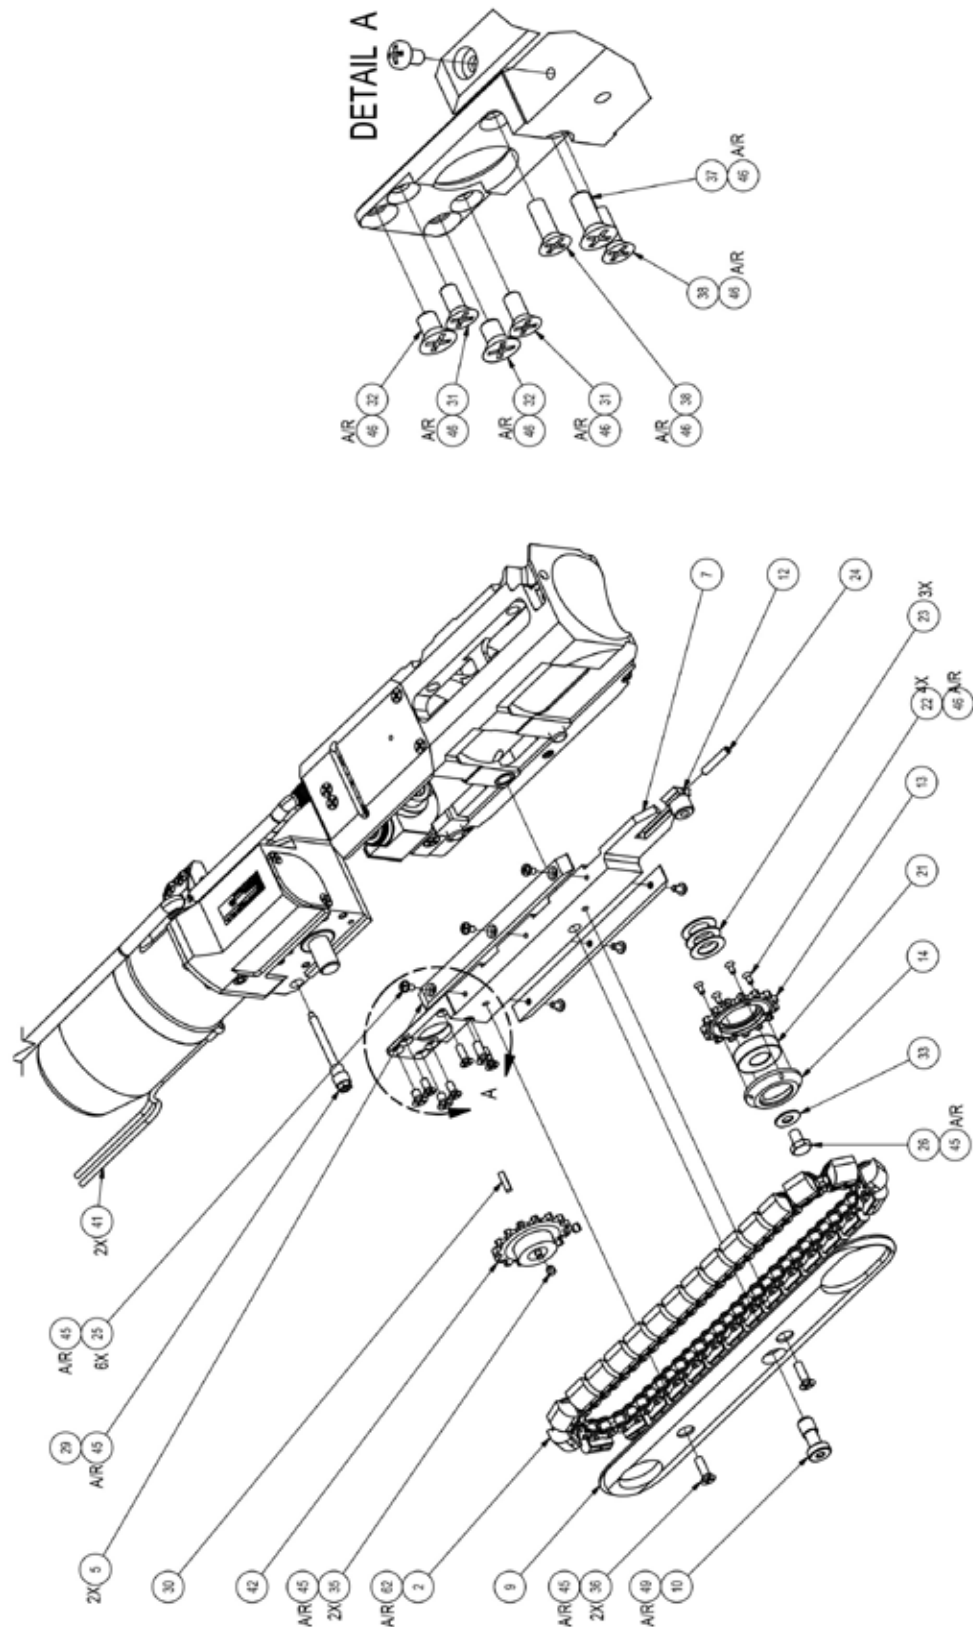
Transporter Assembly, Ultra Shorty III, TX360
